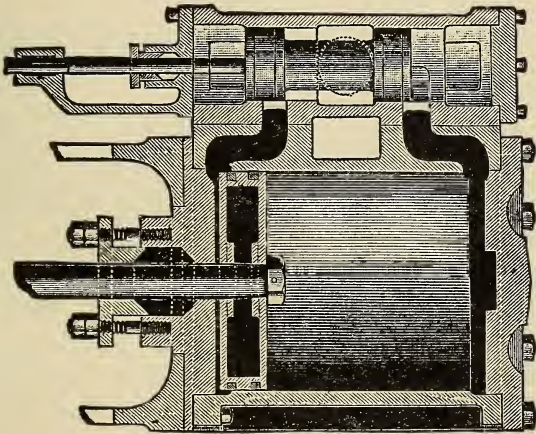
Section of cylinder showing the construction of a piston valve. This type of valve is cylindrical in form, the seat consisting of a cylindrical ring containing the ports. As shown in the figures, the valve is arranged for *inside admission*.
